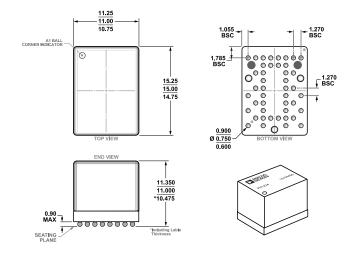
44-Ball Ball Grid Array Module (ML-44-1) Dimensions shown in millimeters
